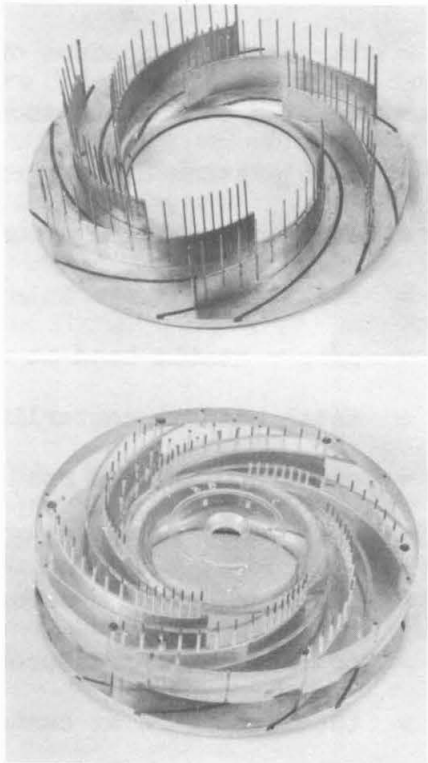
Bottom shroud with vanes and assembled view of test impeller.
